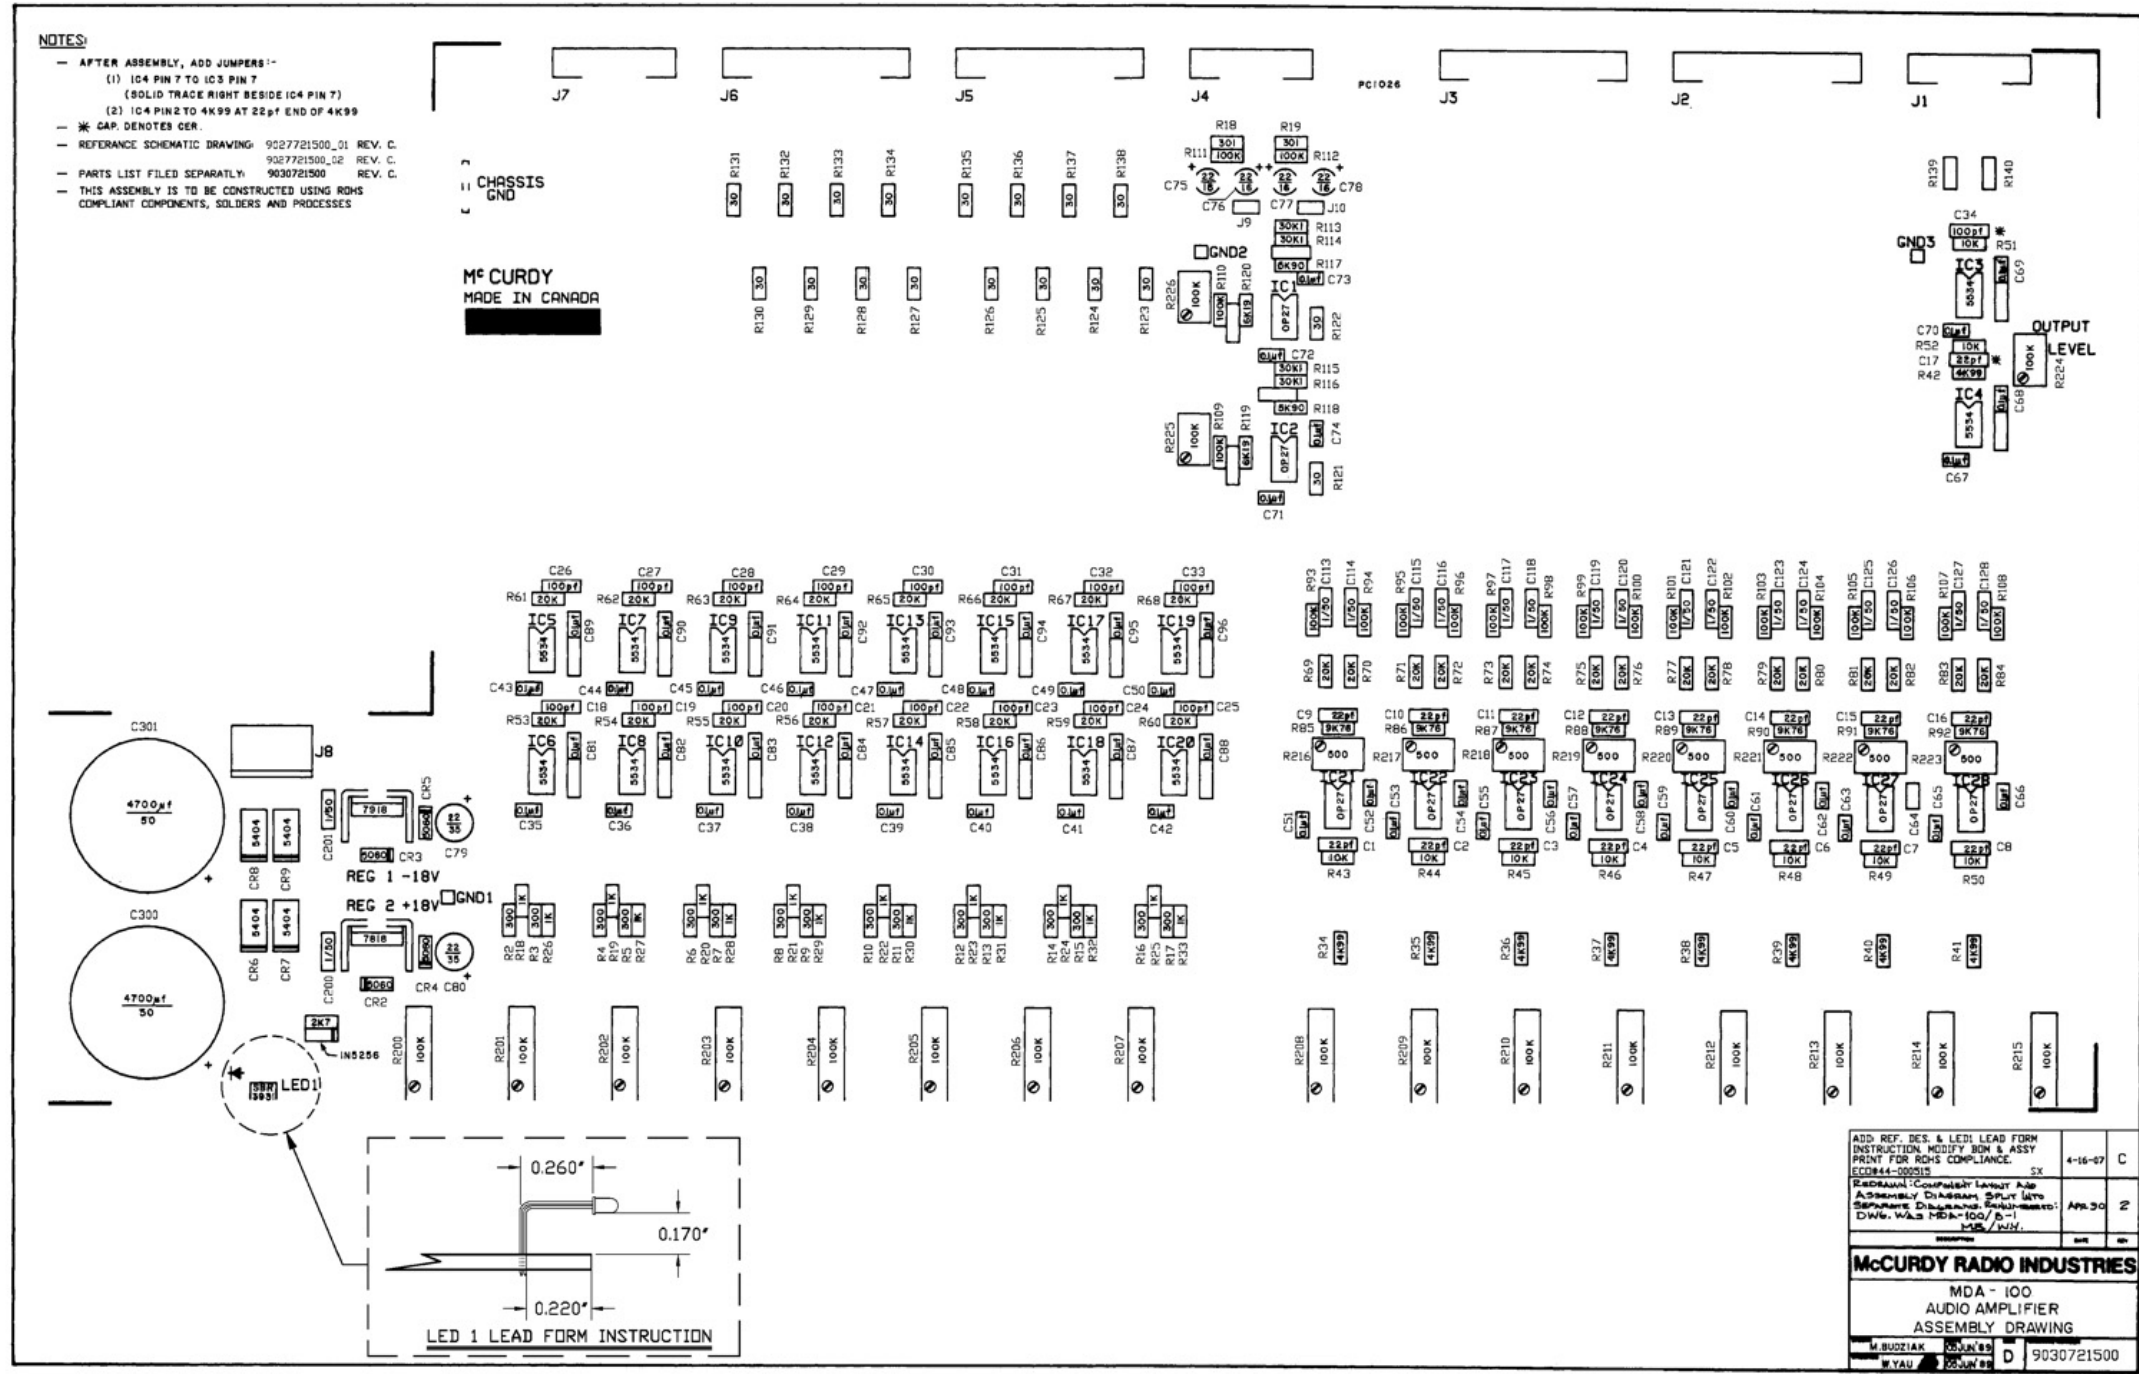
MDA-100 Audio Amplifier Assembly Drawing
